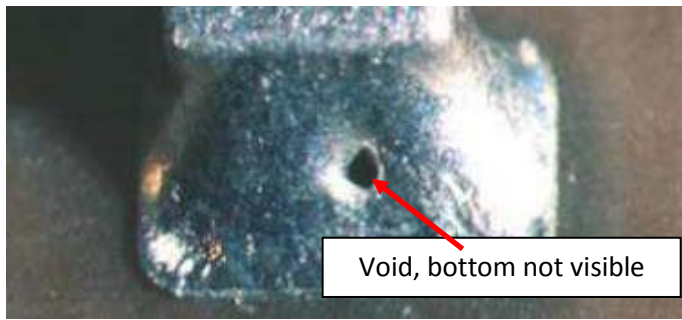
Examples of Unacceptable solder joints - (see also Table 11-1)
